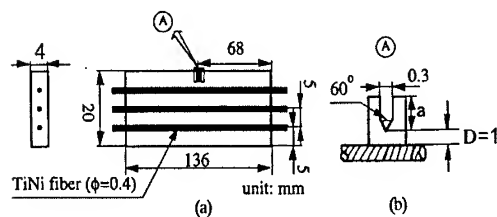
Dimension and shape of test specimen (TiNi/epoxy and TiNi/CFRP composite)
